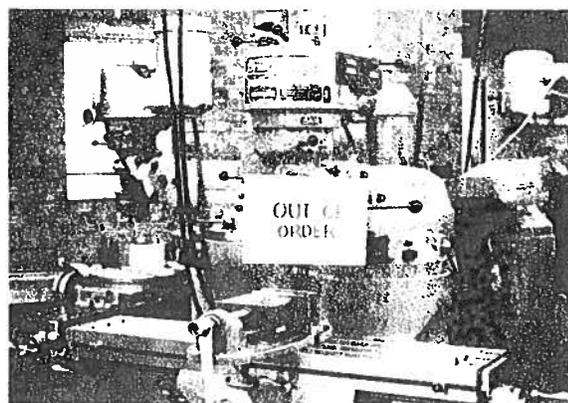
Mark out-of-order equipment with a blue sign.
